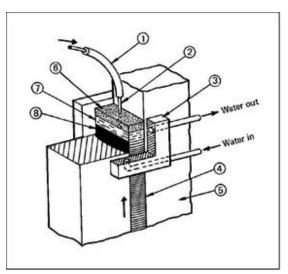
Schematic sketch of Electroslag Welding Process. (1) Electrode guide tube, (2) electrode, (3) watercooled copper shoes, (4) finished weld, (5) base metal, (6) molten slag, (7) molten weld metal, (8) solidified weld metal. (Eltxtric, T.L. and T.L. Electric, 1973; Edition, F., 2011)
